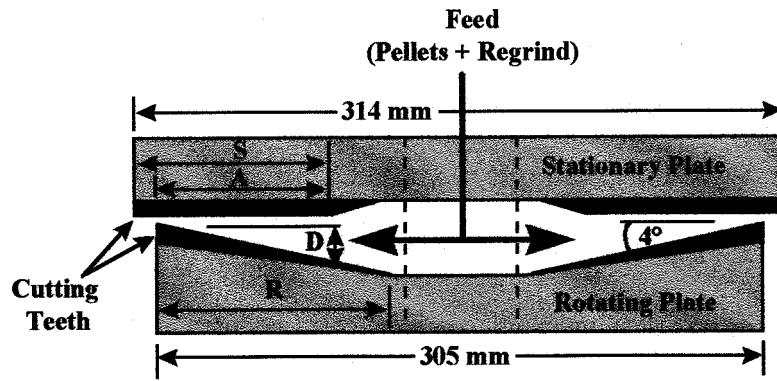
Typical horizontal grinding plates for rotational moulding powders
